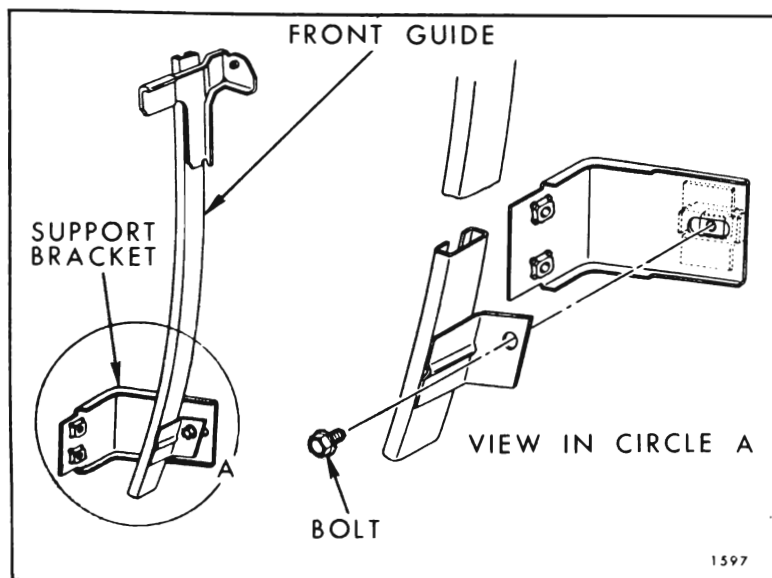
Front Guide to Support Bracket Attachment - 68069-68169 Styles
